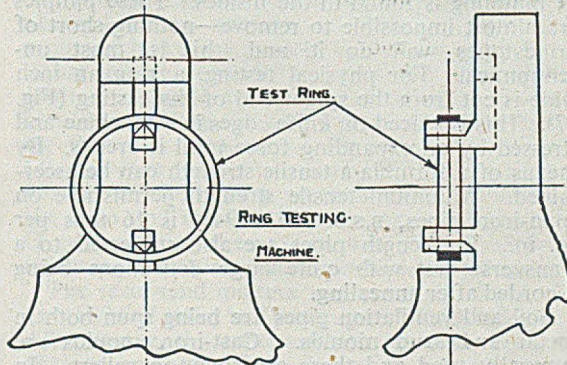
Tensile Testing Machine for Pipe Castings. Rings Cut from the Castings are Broken on Expanding Knife Edges.
